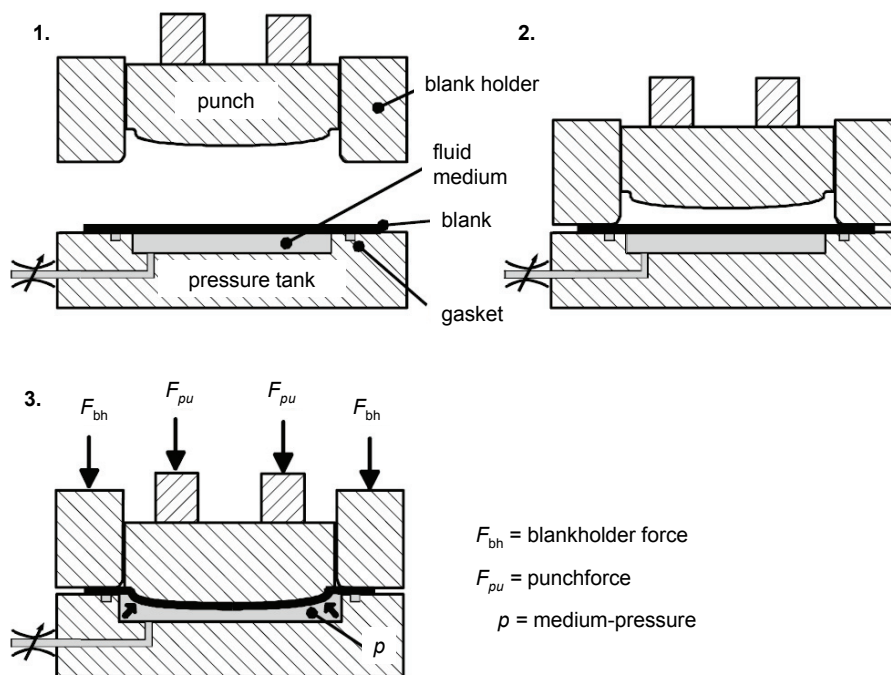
Hydro-mechanic deep drawing with punch [3]
